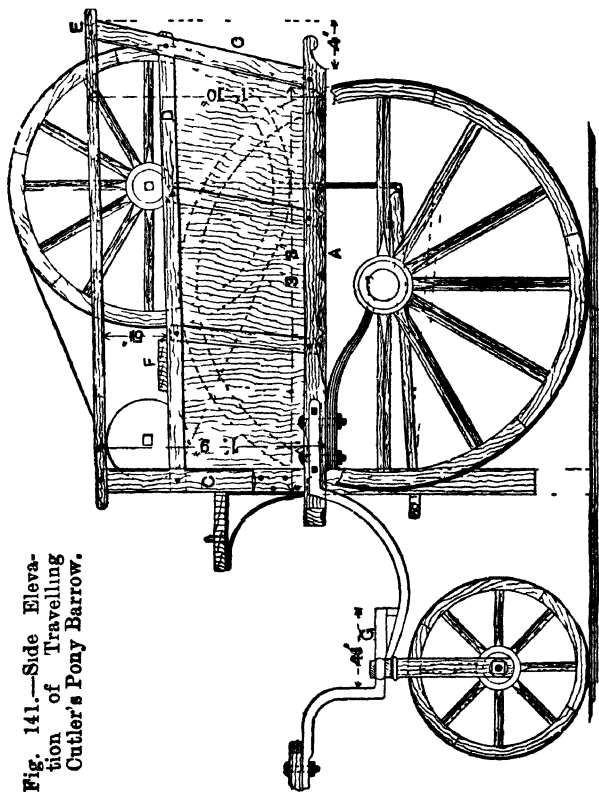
Side Elevation of Travelling Cutler's Pony Barrow.
